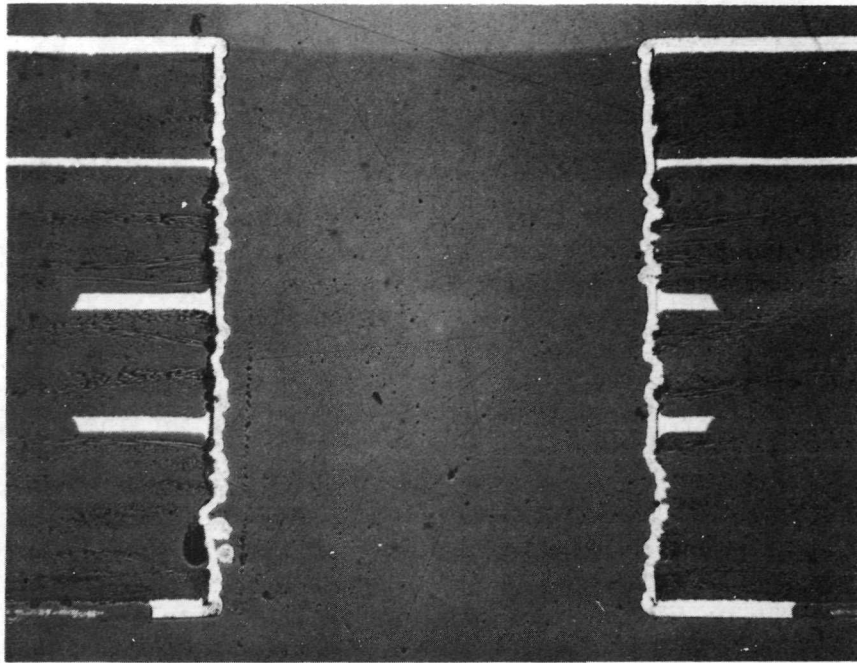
Photomicrograph (35X) of a Cross Section of the Plated-Through Hole with Crack and Separation Defects Used to Obtain the Data in Figure 62.
